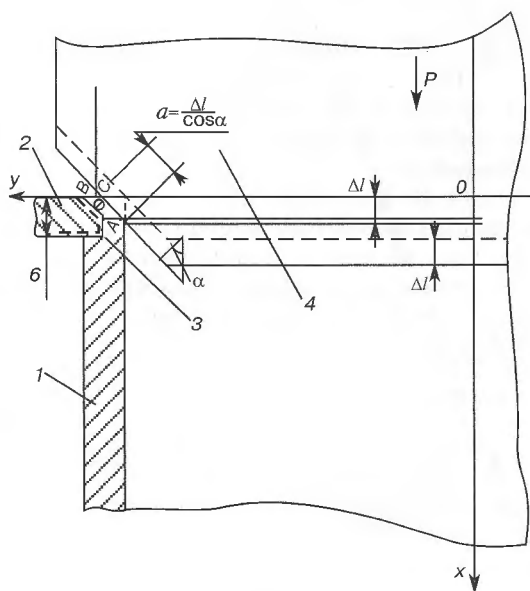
Joining of flange with a grooving to a pipe with a grooving: 1 – pipe with a grooving; 2 – flange with a grooving; 3 – brazing alloy in a formed joint; 4 – welding punch.
